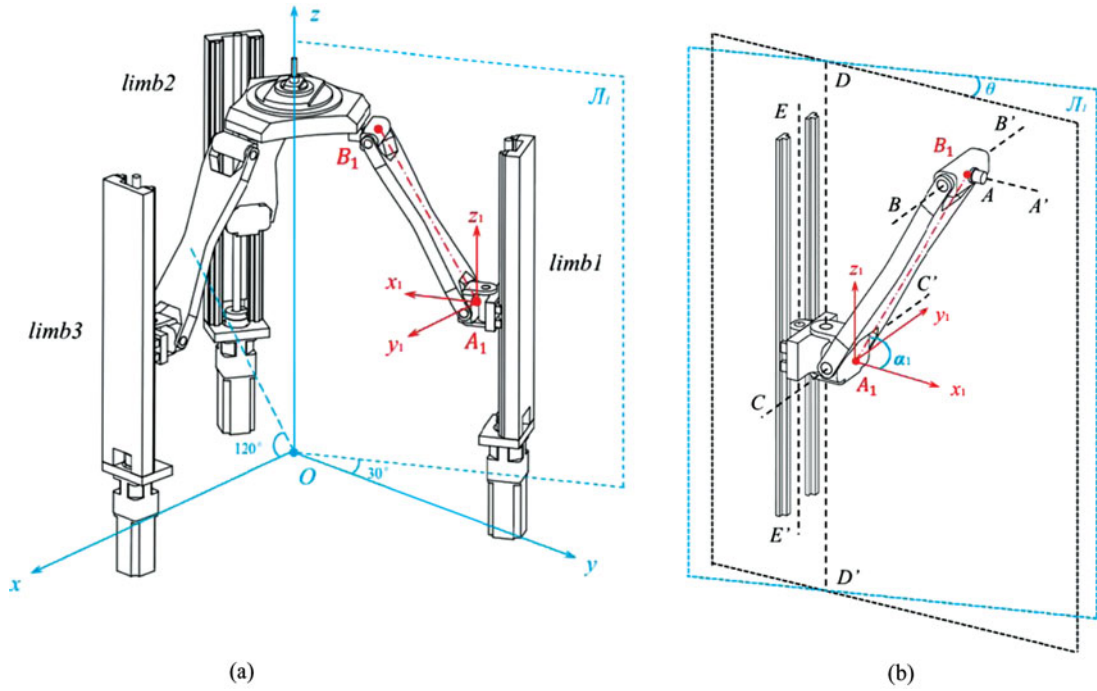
CAD models of 3-PUU parallel kinematic mechanism. (a) CAD model of the 3-PUU mechanism. (b) CAD model of limb1.
